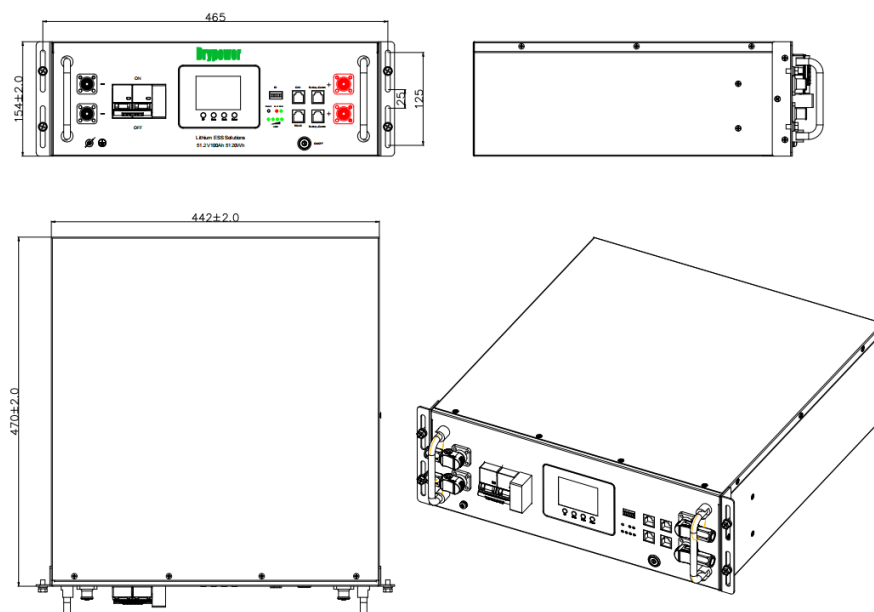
DP-24200-R Appearance & Dimension Drawing
